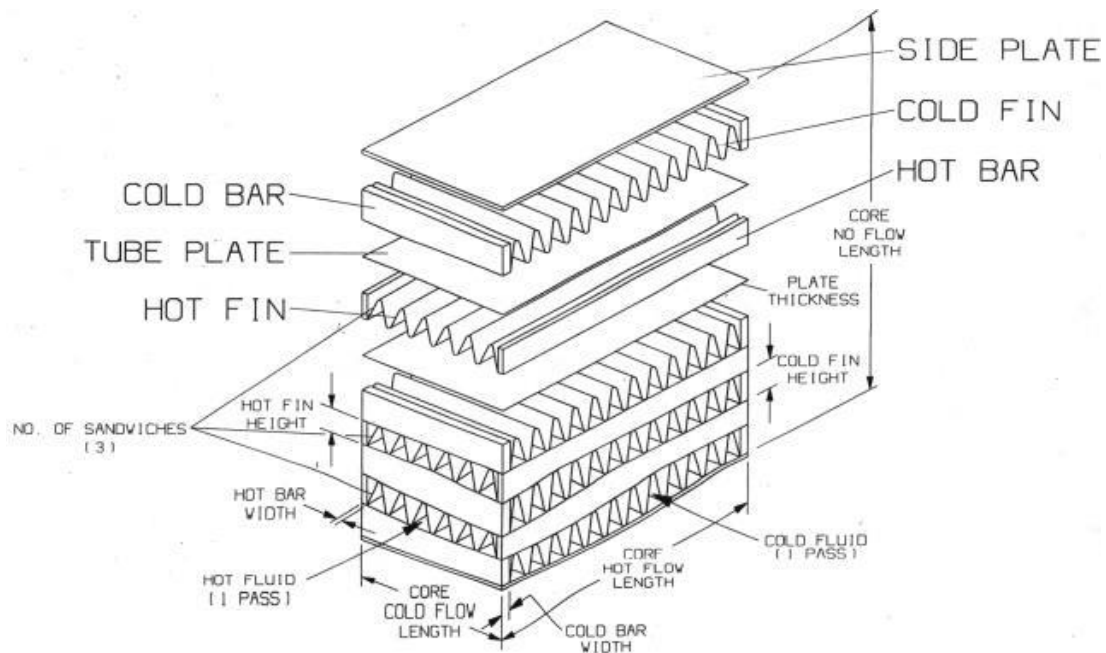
Plate-and-fin aerospace HX: assembly [55]
